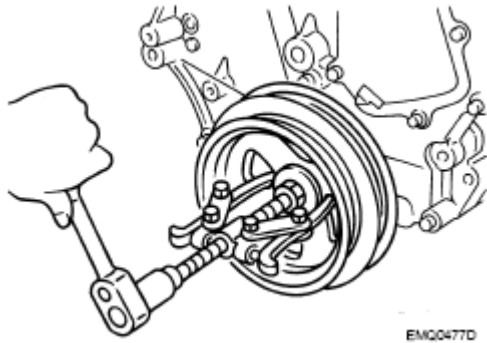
Placing Puller Tab On Holes Of Crankshaft Pulley
